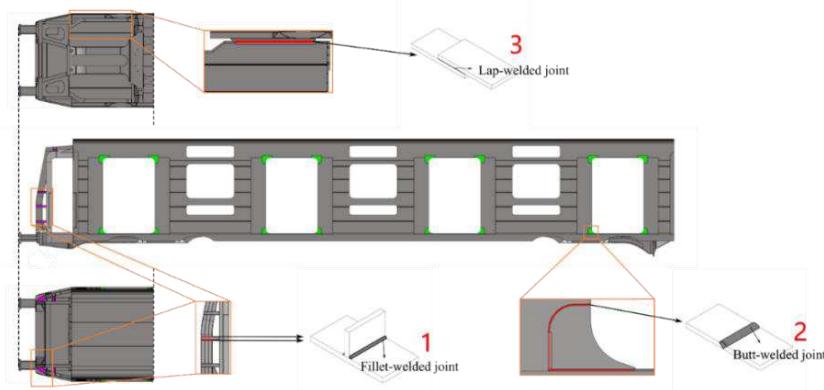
Schematic diagram of weld structure of head carbody
